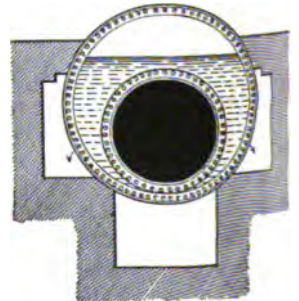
Explosion of a Cornish boiler from external corrosion.
